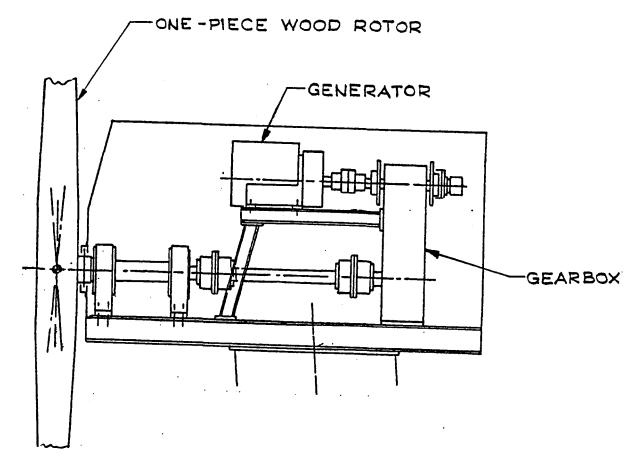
Concept 6: Gearbox mounted on far side of tilted bedplate
